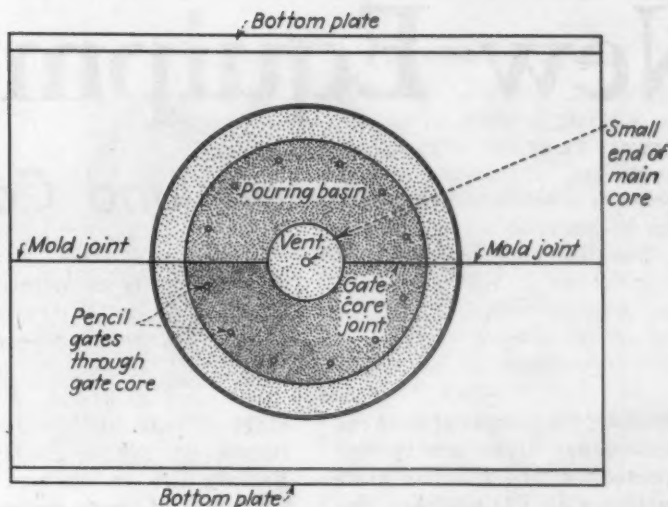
Top view of the mold in pouring position, indicating the location of the pencil gates.
